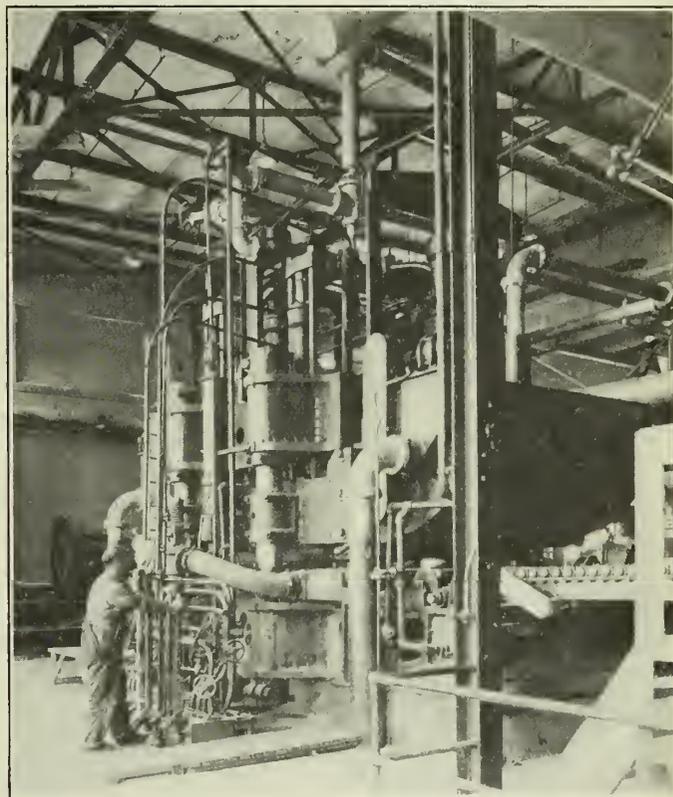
Forming Machine showing Arrangement of Platens and Hydraulic Press.
